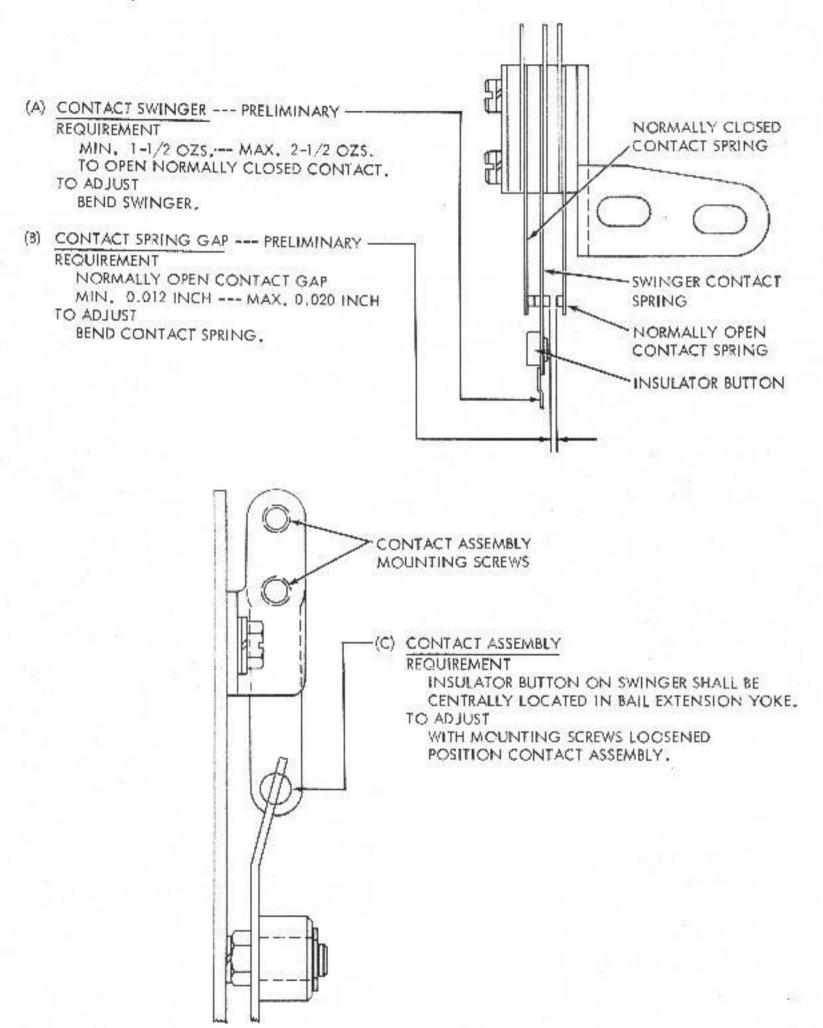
, END OF FEED-OUT TIMING CONTACT FOR NON-INTERFERING LETTERS AND BLANK FEED-OUT MECHANISMS
